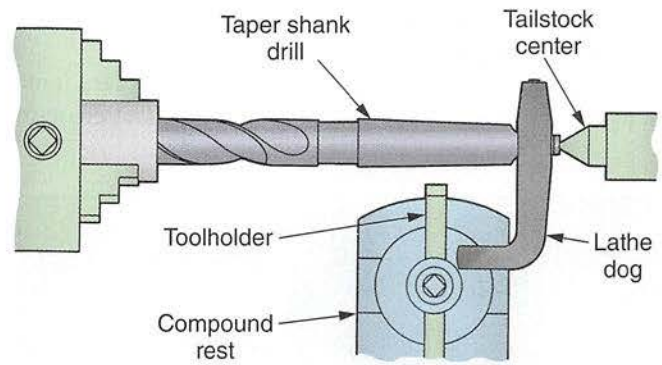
When drilling on a lathe, the workpiece is held in the headstock and rotated while the stationary drill, held in the tailstock, is advanced into the work. The cutting fluid helps to reduce heat and flush away chips.
